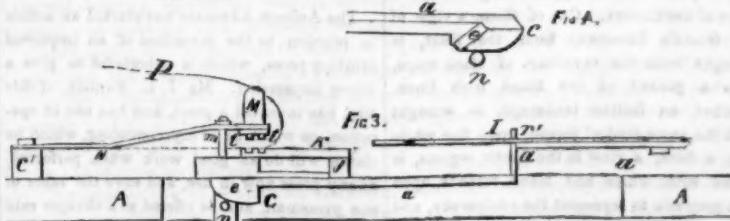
is a section of the platform; I is a metal plate; r' is a pin by which this plate is moved by the arm below; a a a are metal bars attached to the plate, I. C is the thick end of the bar made like a door latch-knob; e is a pin over which the latch passes to bring down the crumper; N is a spring to throw the
